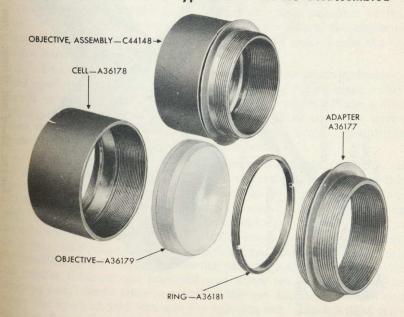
Field Glass, Type "EE"—Objective Disassembled
